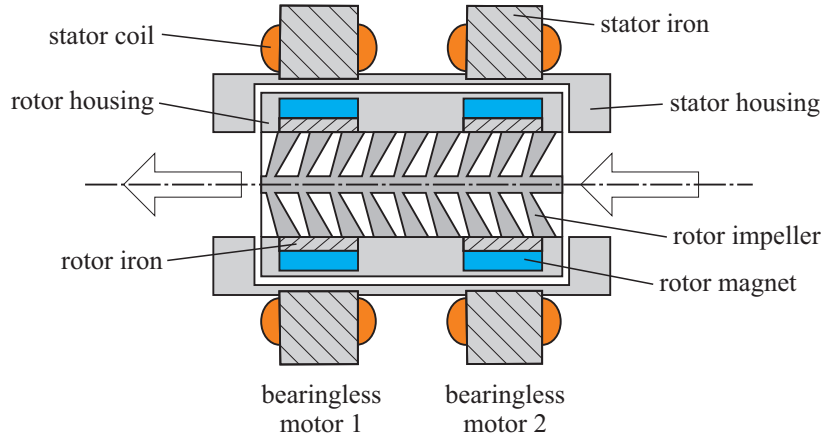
Basic setup of the bearingless twin drive axial-flow pump system.
